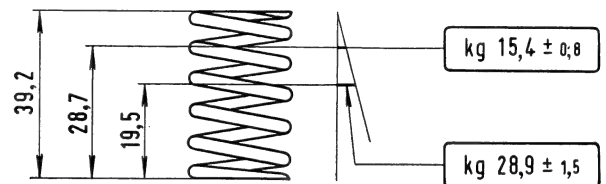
115 C.005 engine inner valve spring testing data.
